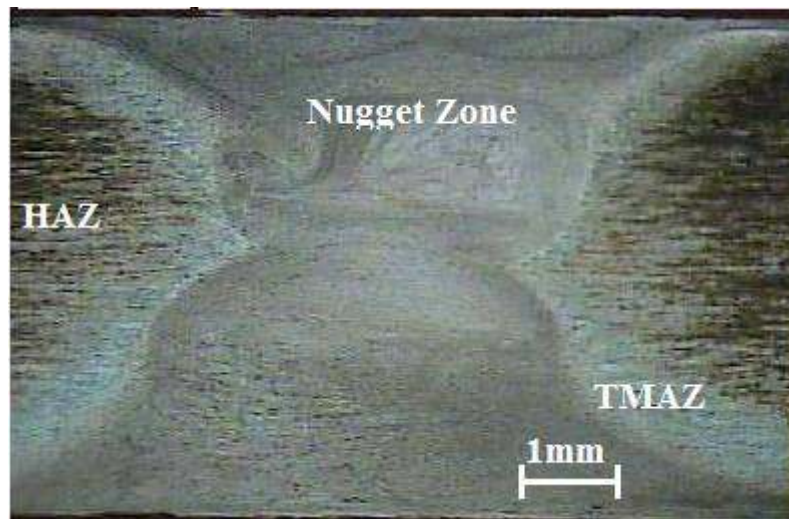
Macrostructure of welded specimen welded with 0.5 mm pin clearance and opposite pin rotational speed direction
